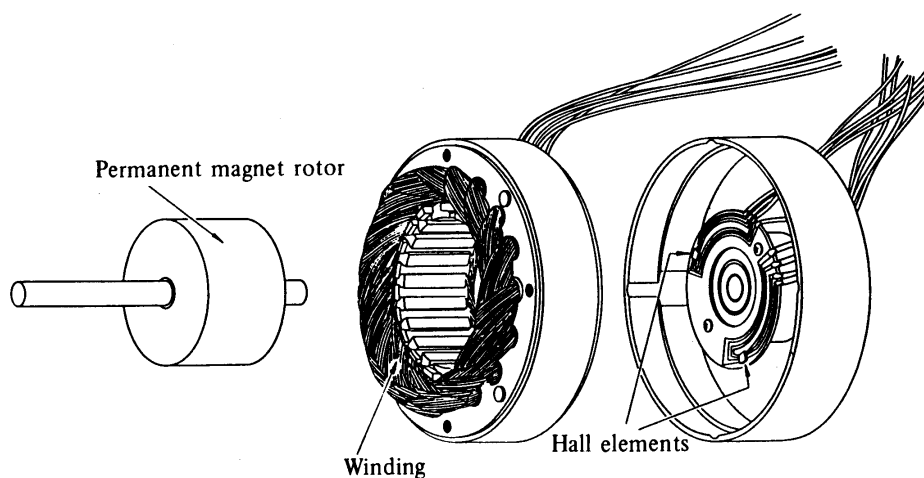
Disassembled view of a brushless dc motor (from Ref.[1] p58 Fig.4.1)
